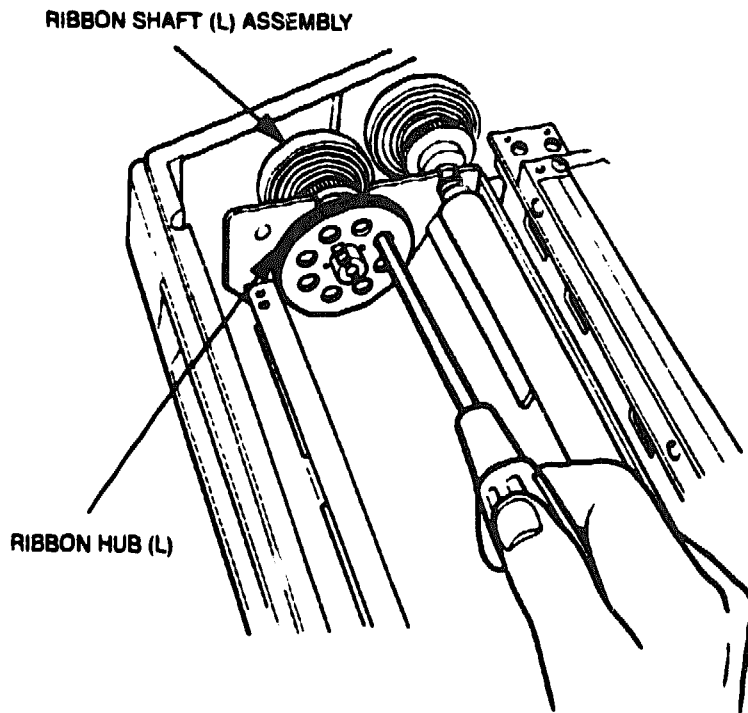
Ribbon Shaft (L) Assembly Removal
